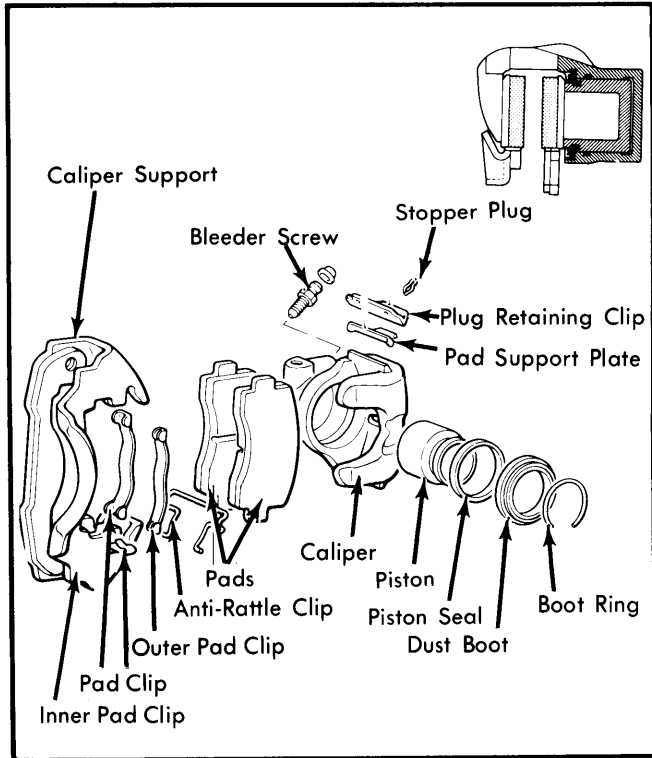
Exploded View of Front Disc Brake Caliper Used on Challenger, Sapporo & Colt St. Wgn.
